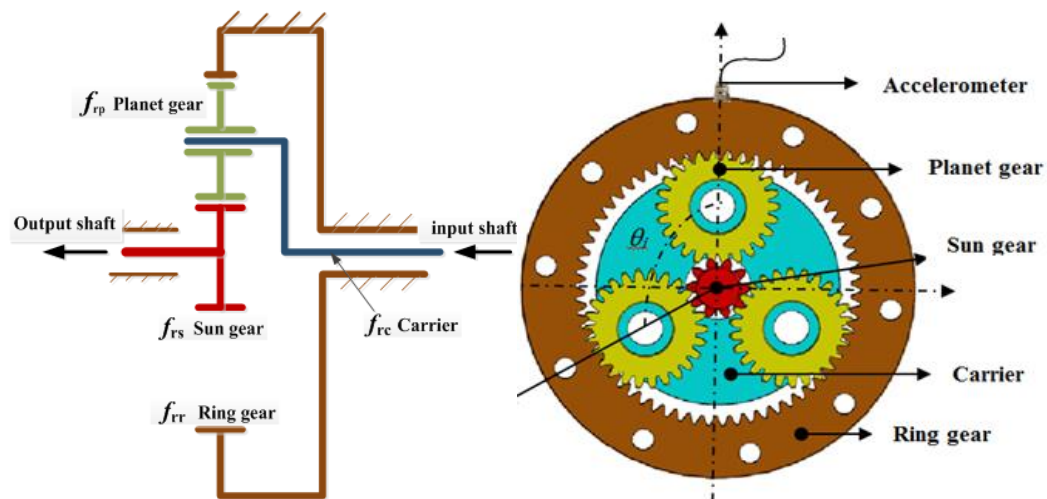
Schematic of planetary gear set with the standstill ring gear
